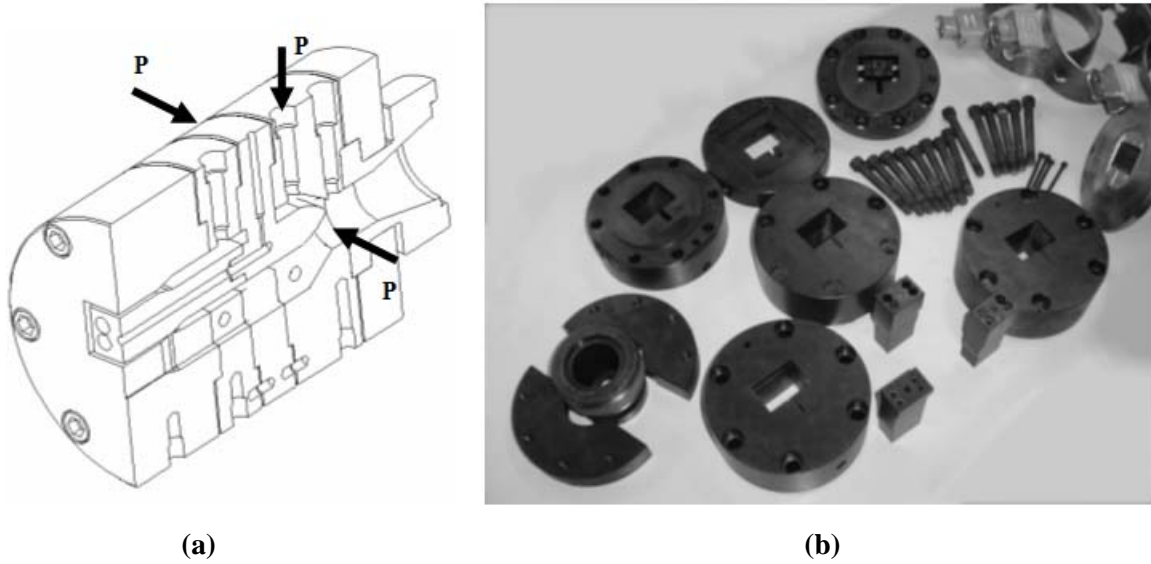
Modular extrusion die used in the experimental work: (a) sectioned view of a typical die and location of the pressure transducers (P); (b) set of pieces used to built the three dies used.
